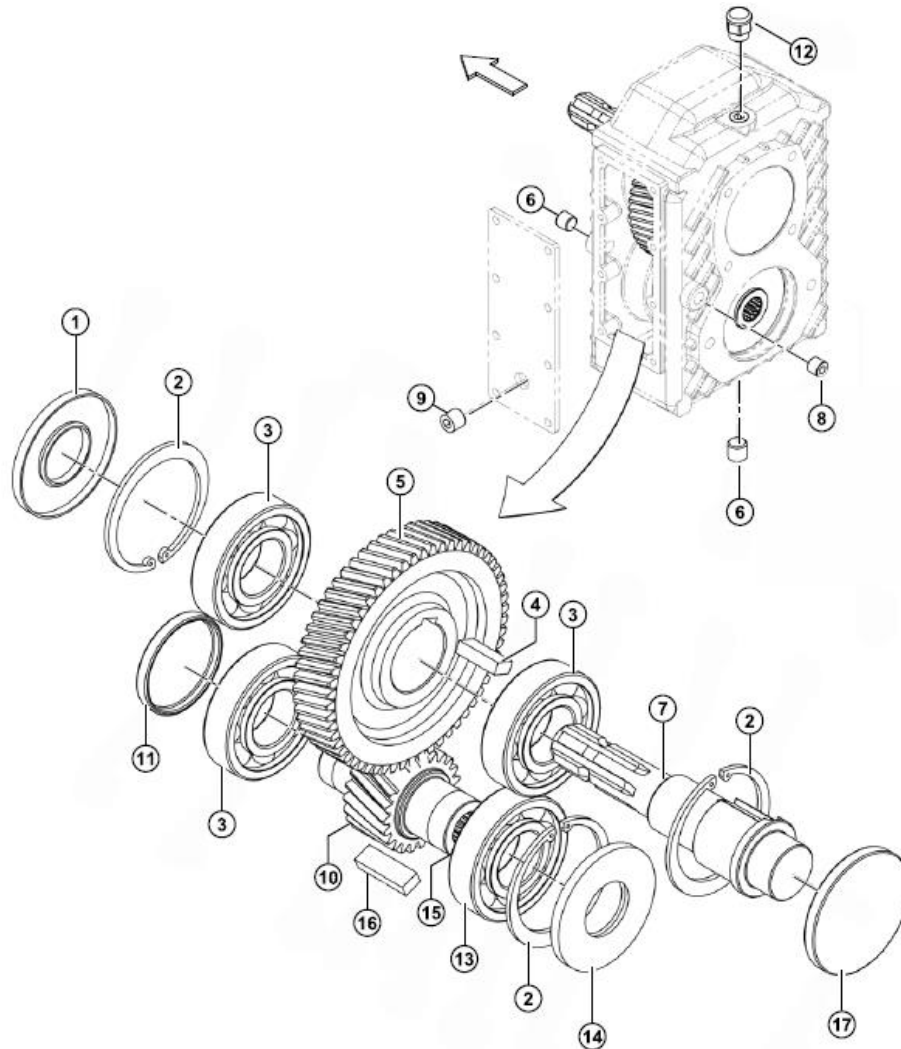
Comer offset gear box (exploded view). Adapted from [7].
